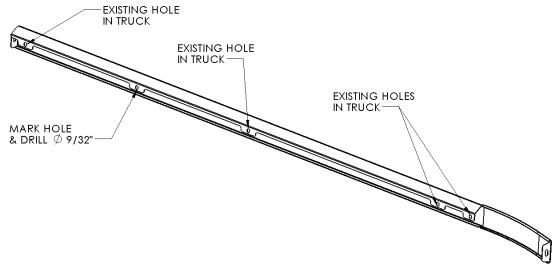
DRIVER SLEEPER PANEL, SHOWN FROM BACK
